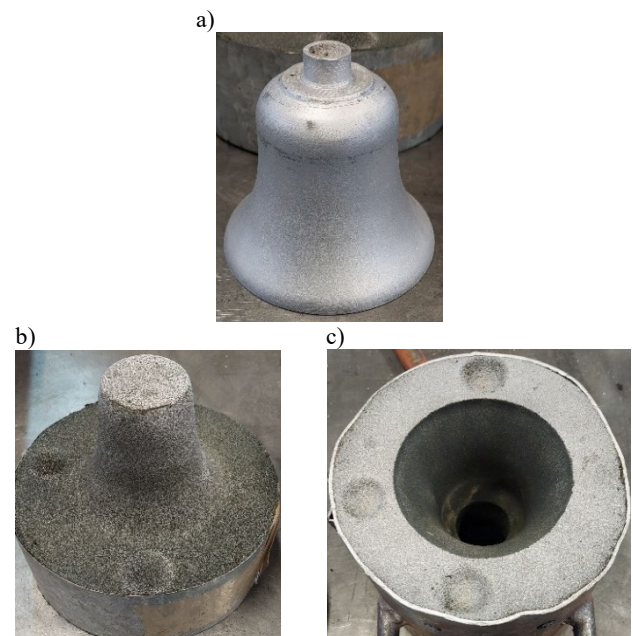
3D-printed pattern (a) and drag mold /core (b) and cope mold (c)
